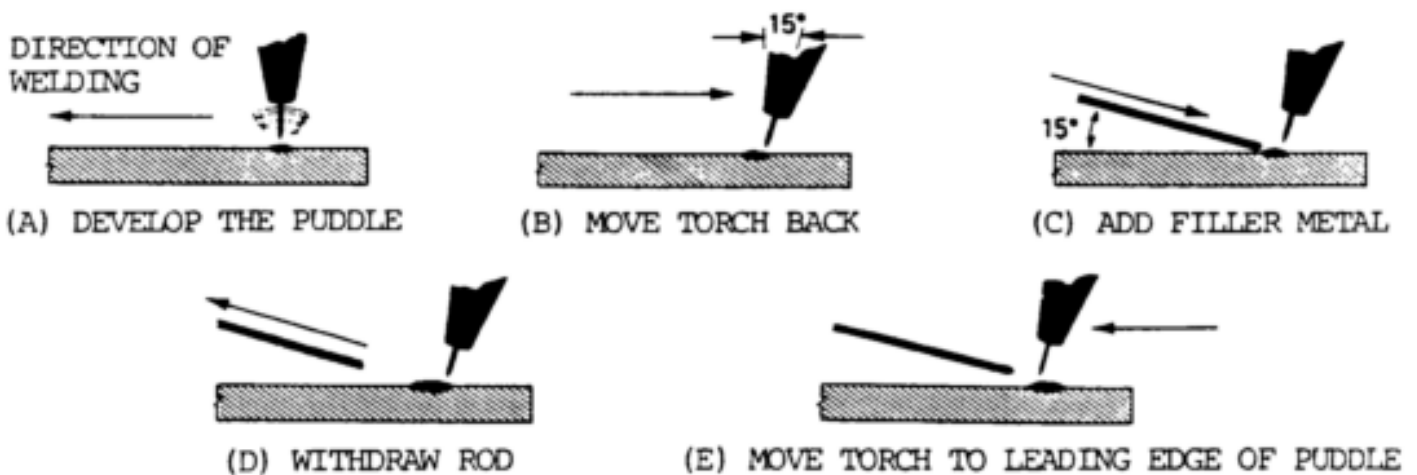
Technique for manual gas tungsten arc (TIG) welding.
